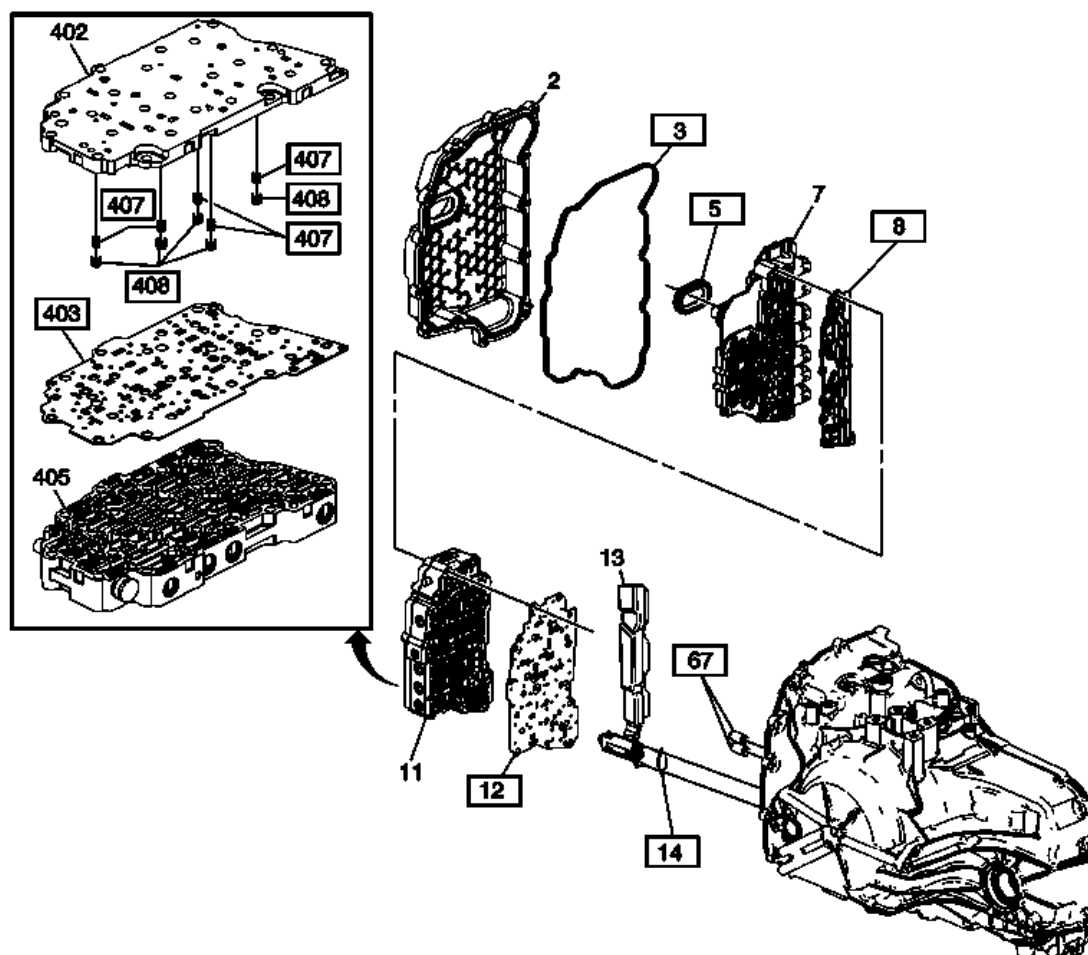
Control Valve Body Kit (Gen 2) 24260702
